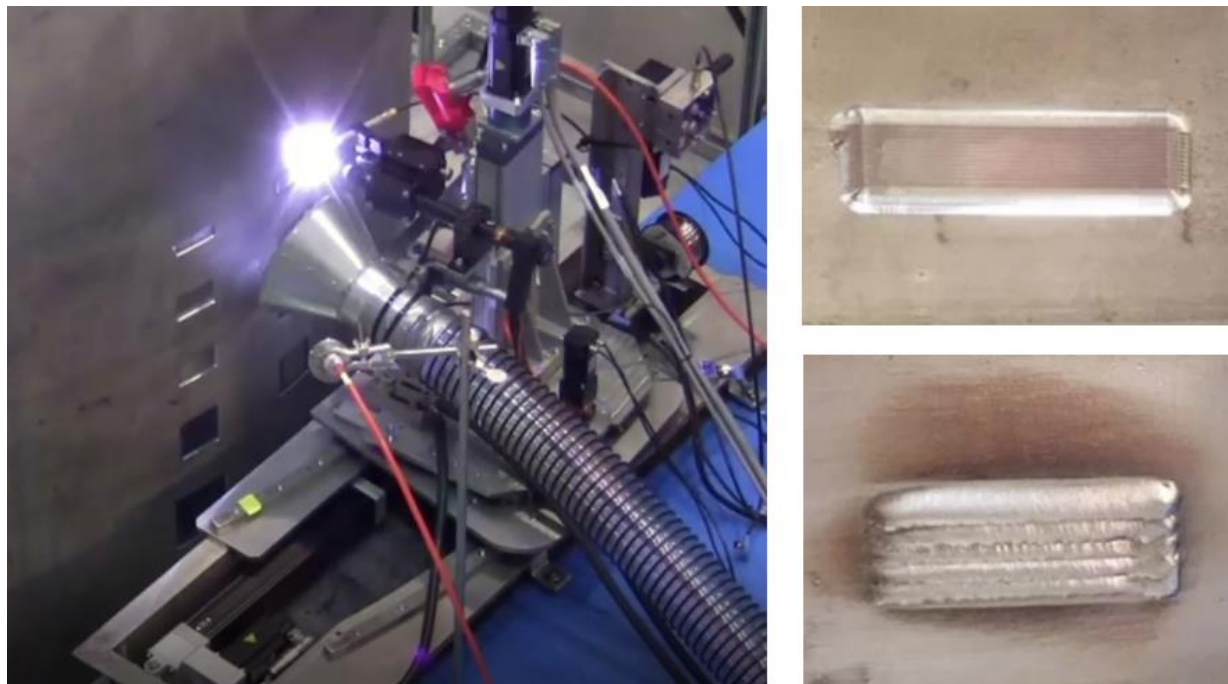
VRM in operation and a completed repair weld. (Left) Photo of VRM in operation. (Top right) As-excavated pocket on canister surface. (Bottom right) Pocket filled with five passes of overlay weld material.
